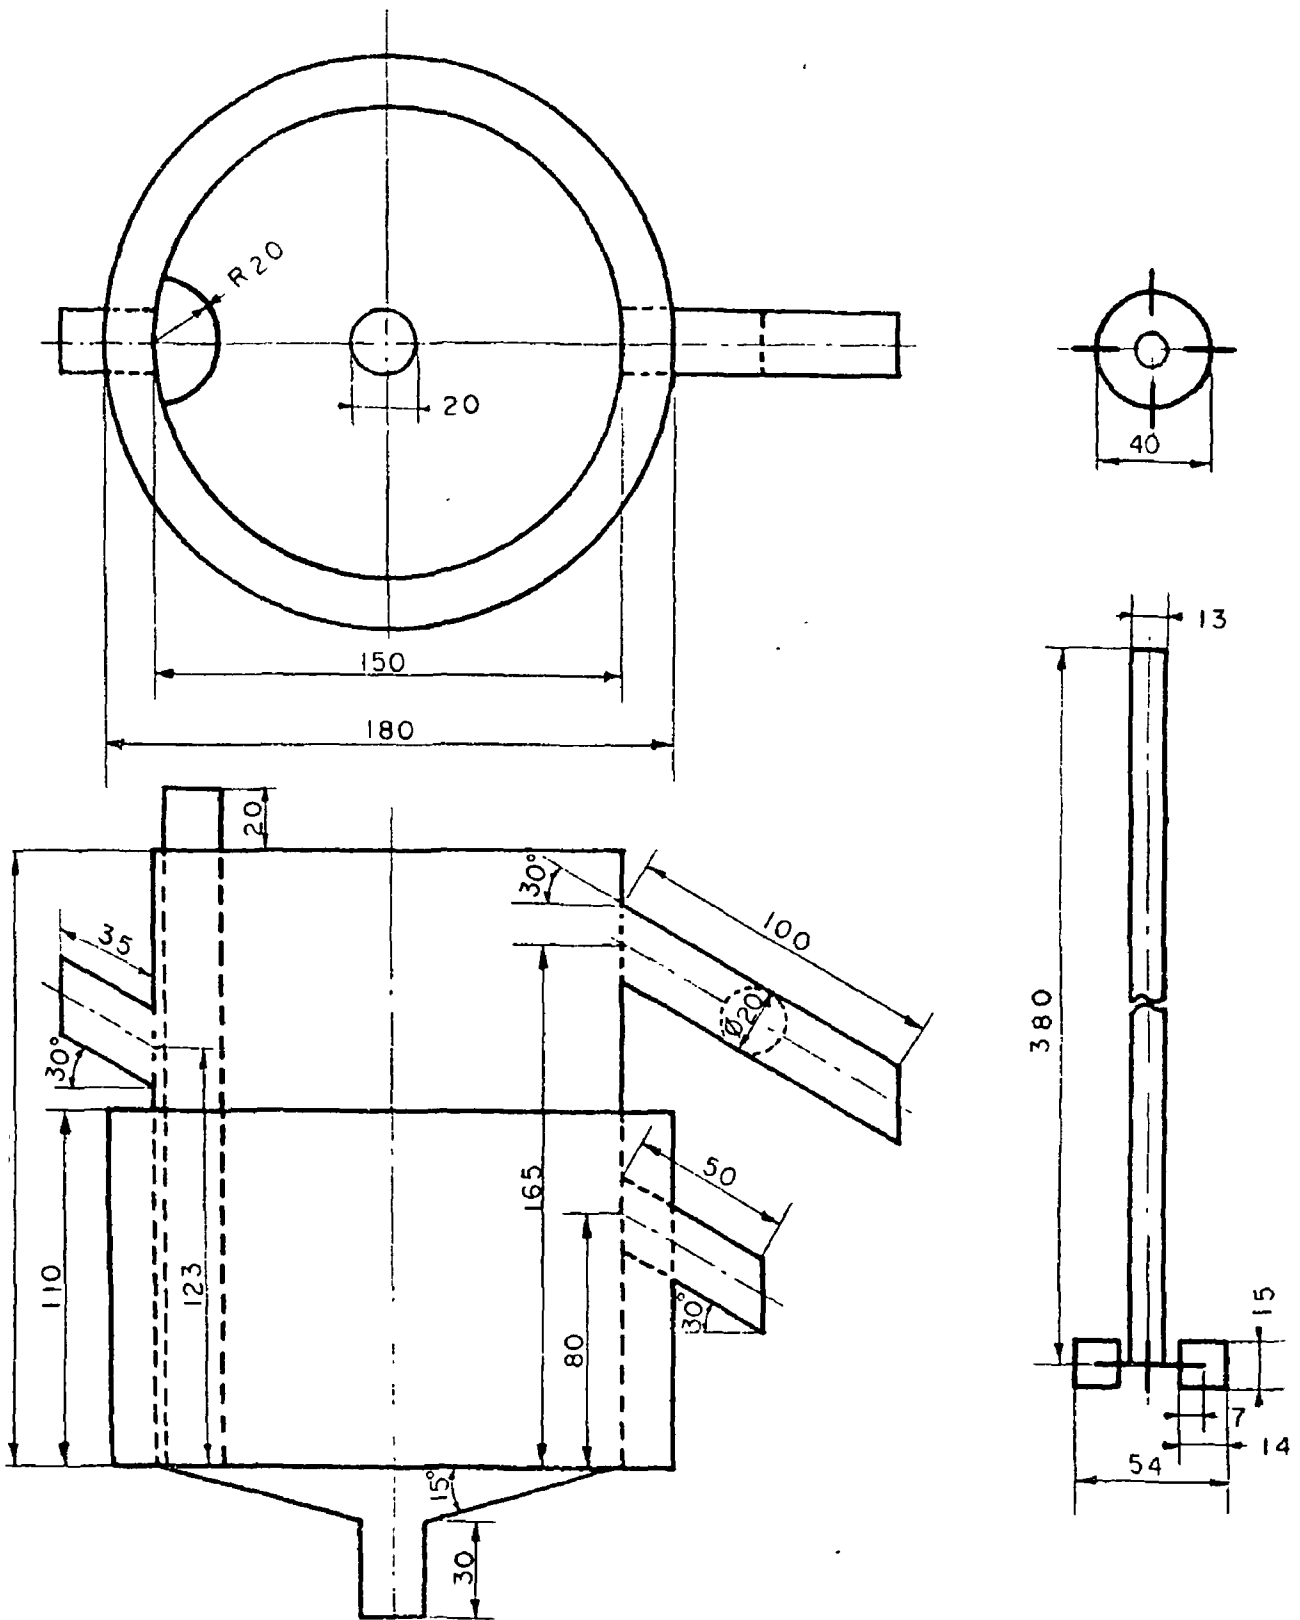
Detail Drawing of Leaching Tank and Stirring Impeller
